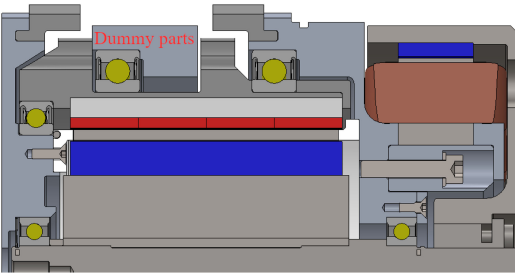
Cross-sectional view of upper half of the drive unit showing the additional bearing and aluminum section on the sprocket.
